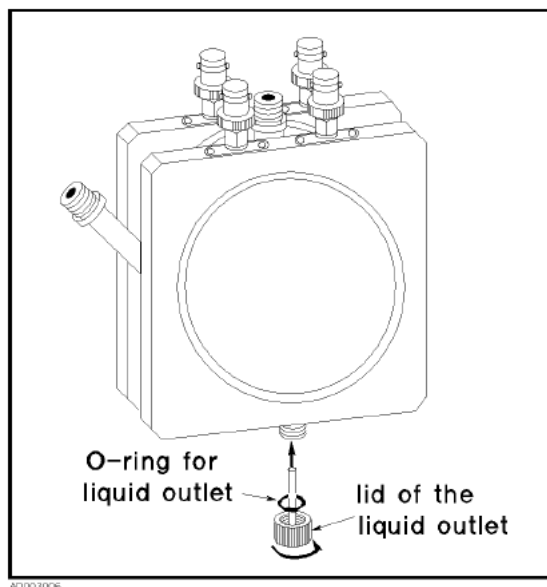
Assembling the Test Fixture for a SHORT compensation
